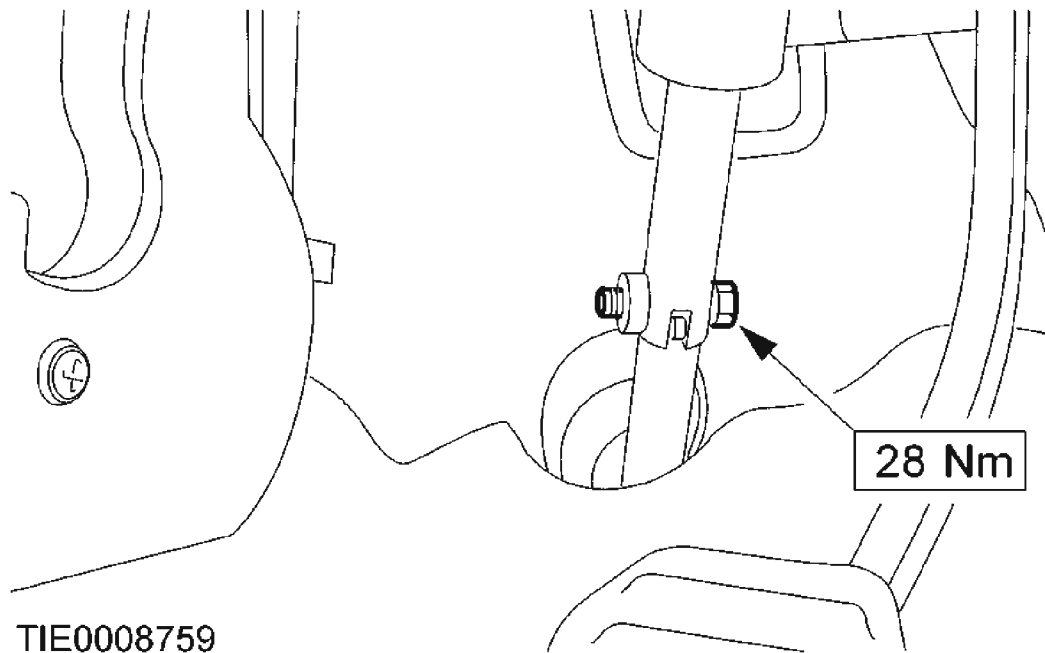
Connecting Steering Column Shaft To Steering Column Coupling Shaft
